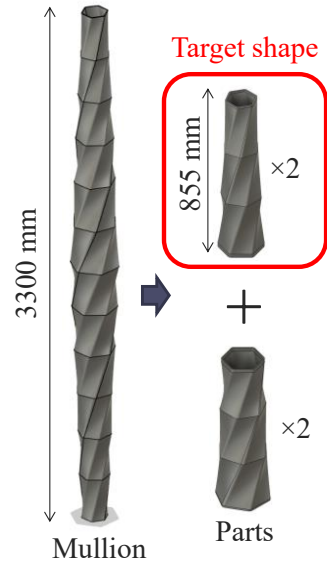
Shape of the target mullion for fabrication and its segmented parts.
